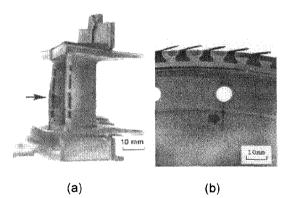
(a) Airfoil bowing, loss of coating and cracking of a CF T56-A15 first stage nozzle guide vane; (b) Crack initiating from bolt hole in CF j85 CAN40/15 compressor disc [15,16].
